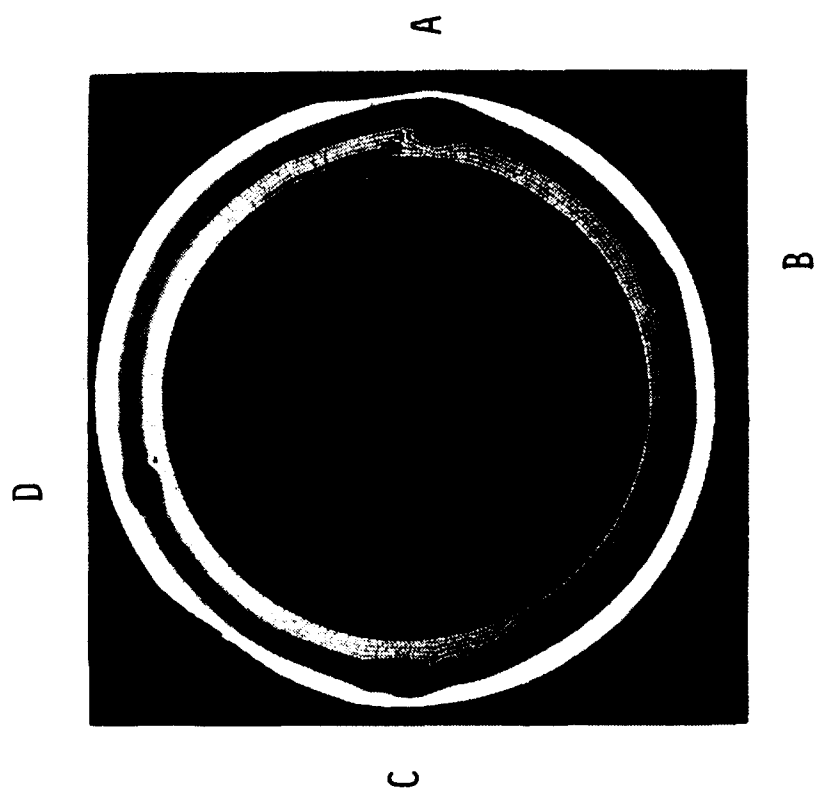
Tube No. 2, Cross Section Microstructural Details.
